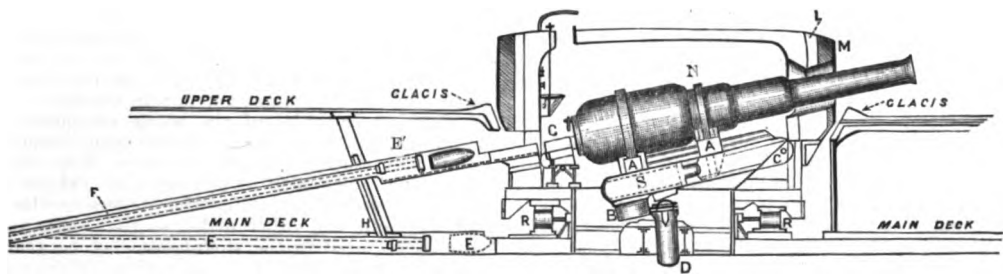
Section of Turret, showing System of Mounting Heavy Guns, and Hydraulic Arrangement for Loading.—H.M.S. *Colossus*.
